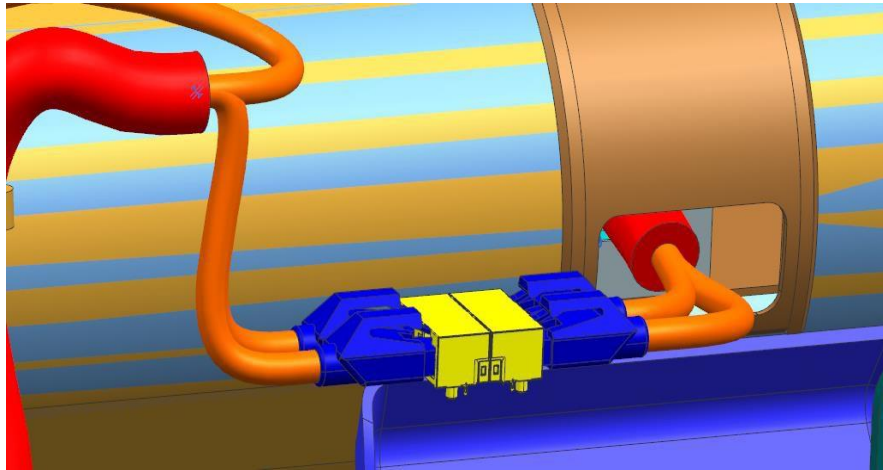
Cross-Car Beam proposed model sheet metal attached detailed view
